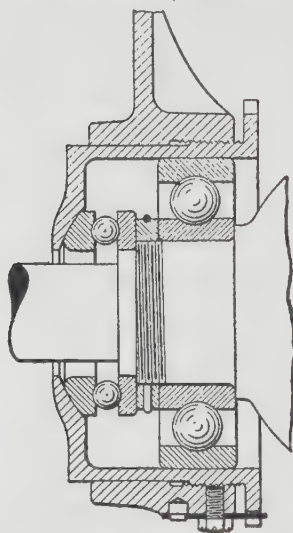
SCREW ADJUSTMENT OF BEVEL GEAR.
